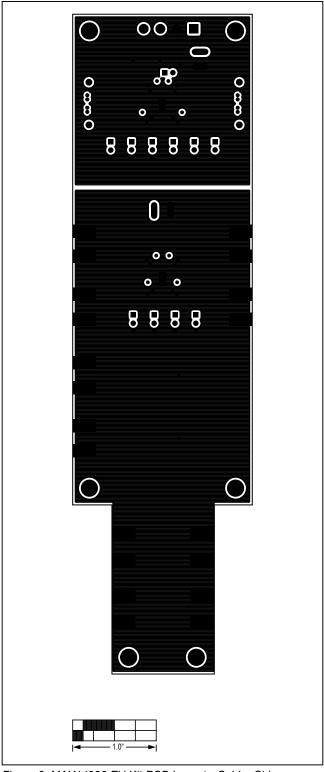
MAX14986 EV Kit PCB Layout—Solder Side
